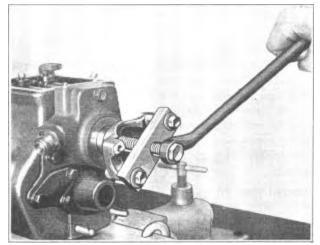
Removing Companion Flange—J-820 Companion Flange Puller
